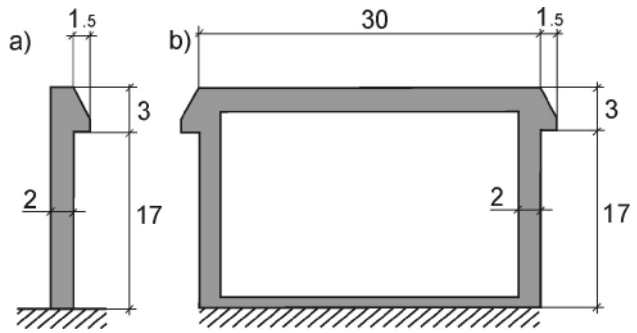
Dimensions (mm) of a) the regular snap fit, b) the initial pressure-based fastener
